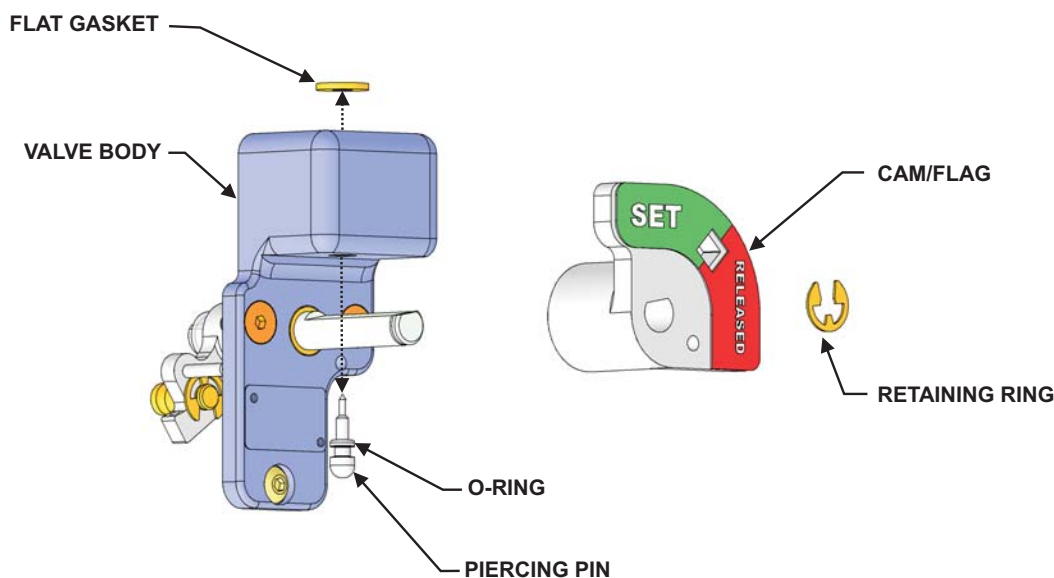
Removal of Piercing Pin and Flat Gasket
